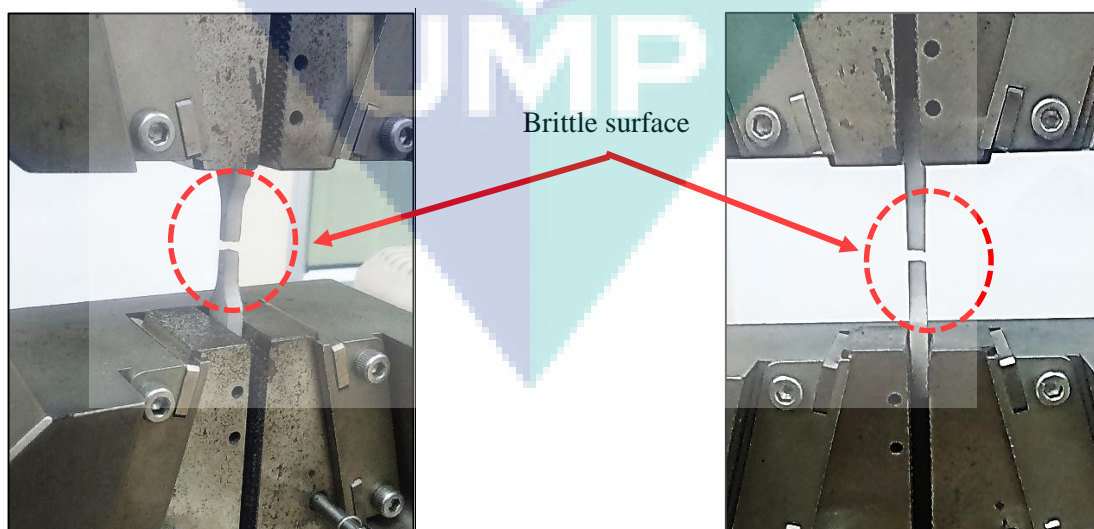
Brittle fracture surface of sintered CoCrMo at 1350°C-3h after tensile test
